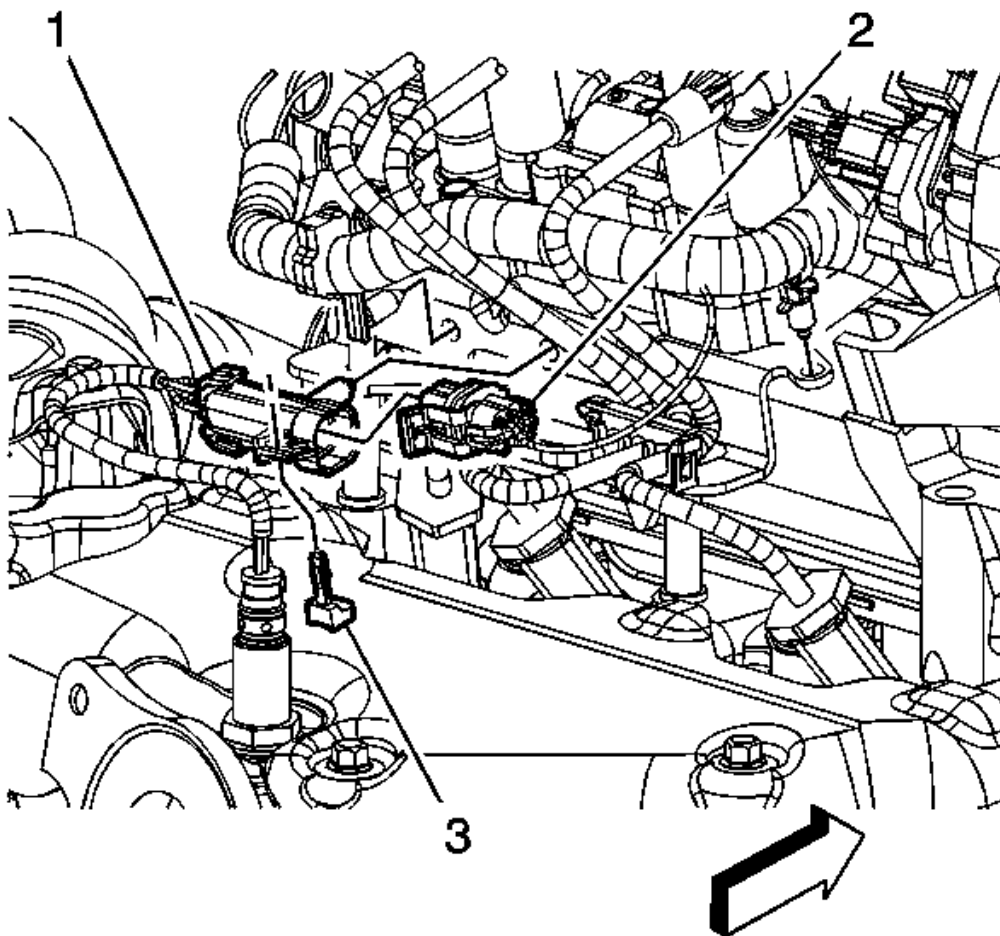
View Of HO2S Electrical Connector Clip & Ignition Coil Bracket
